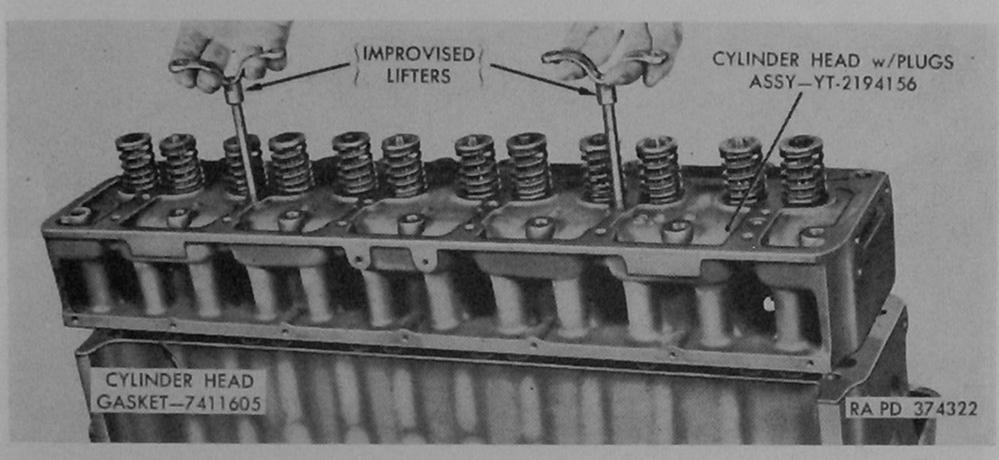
Removing cylinder head with plugs assembly, using improvised lifters.
